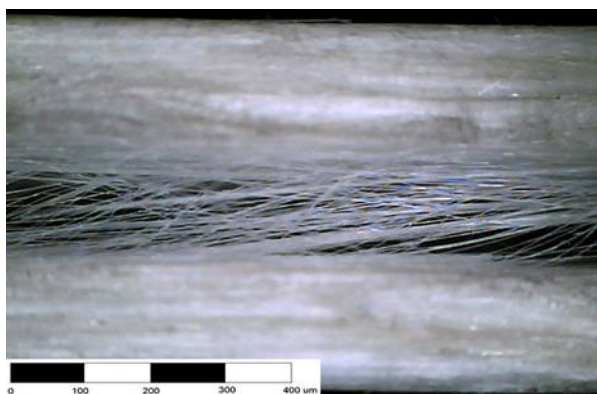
Connection position after failure in the sample with welding time of 1.4s
